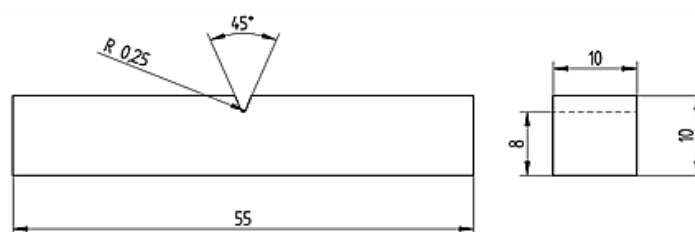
Impact test specimen prepared following ASTM E23 (All dimensions are in mm)
